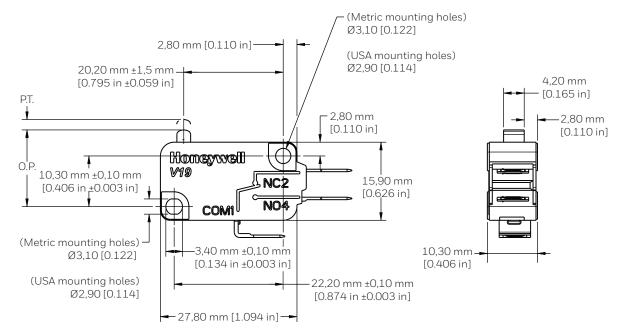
V19 SERIES HOUSING DIMENSIONS
